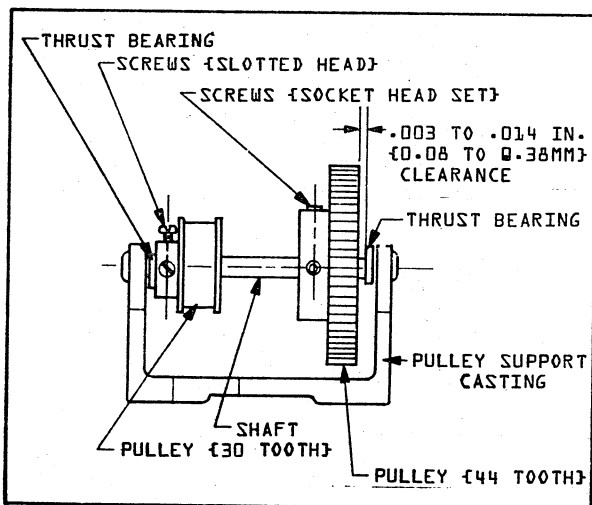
PULLEY ASSEMBLY - RIGHT HAND
